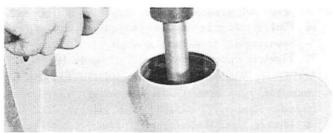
Removing Propeller Shaft Roller Bearing July 1960 Page 75
